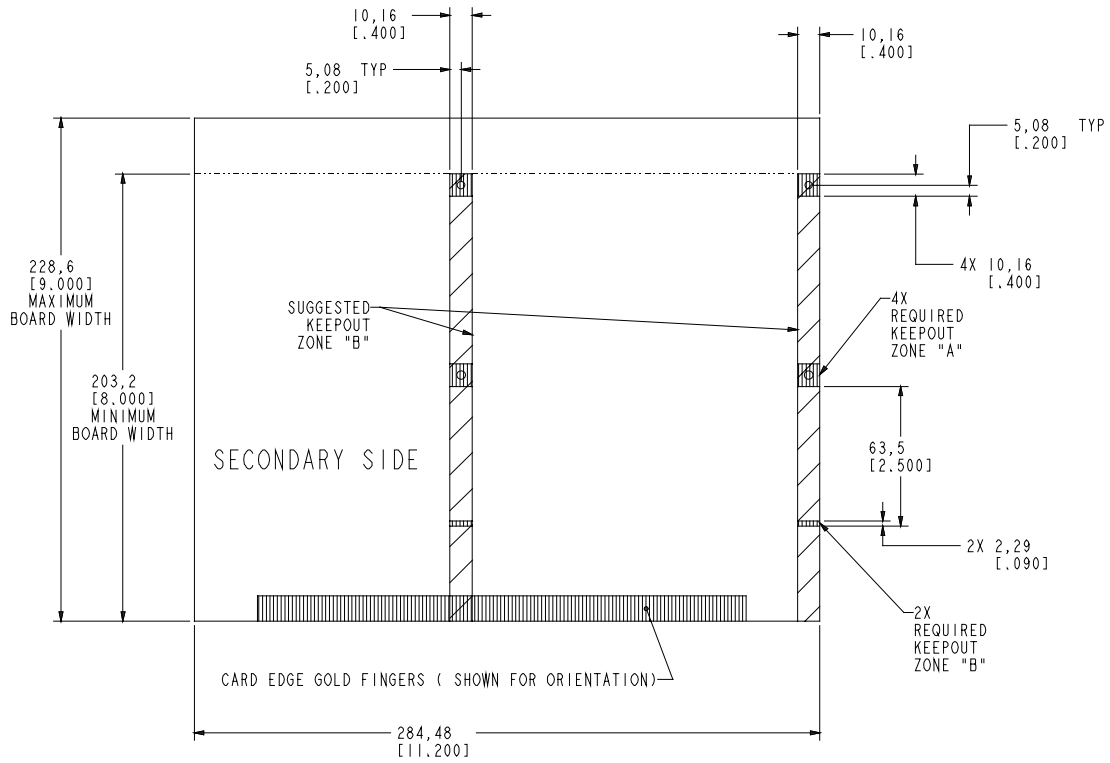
NLX Motherboard Dimensions—11.2" Secondary Side
